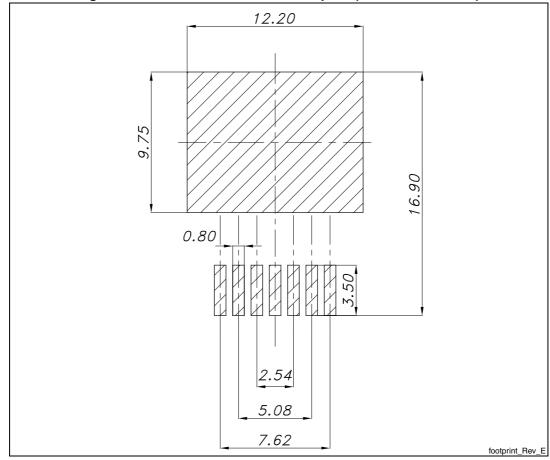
H<sup>2</sup>PAK-6 recommended footprint (dimensions in mm)
